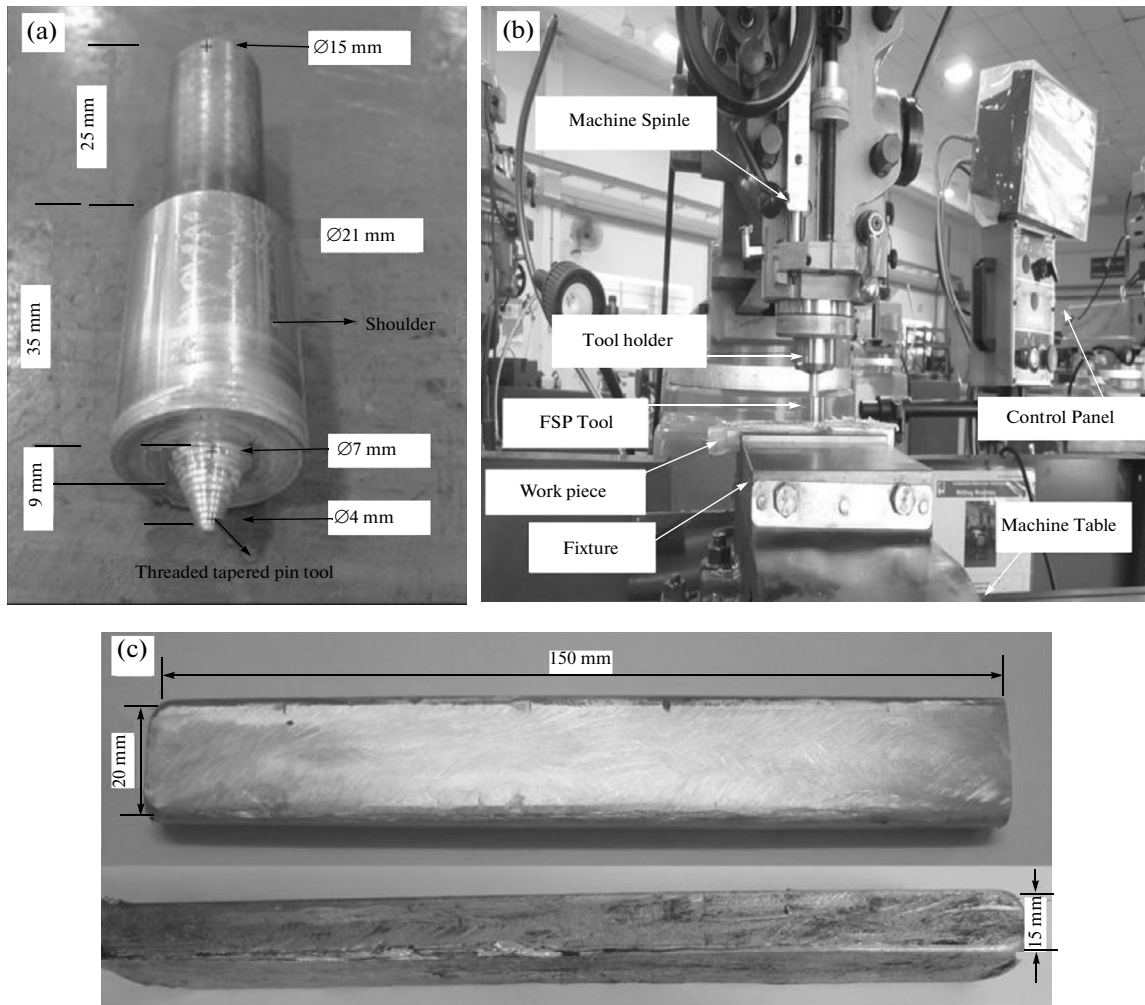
Schematic illustration of (a) FSP tool, (b) FSP machine, and (c) work piece samples.
